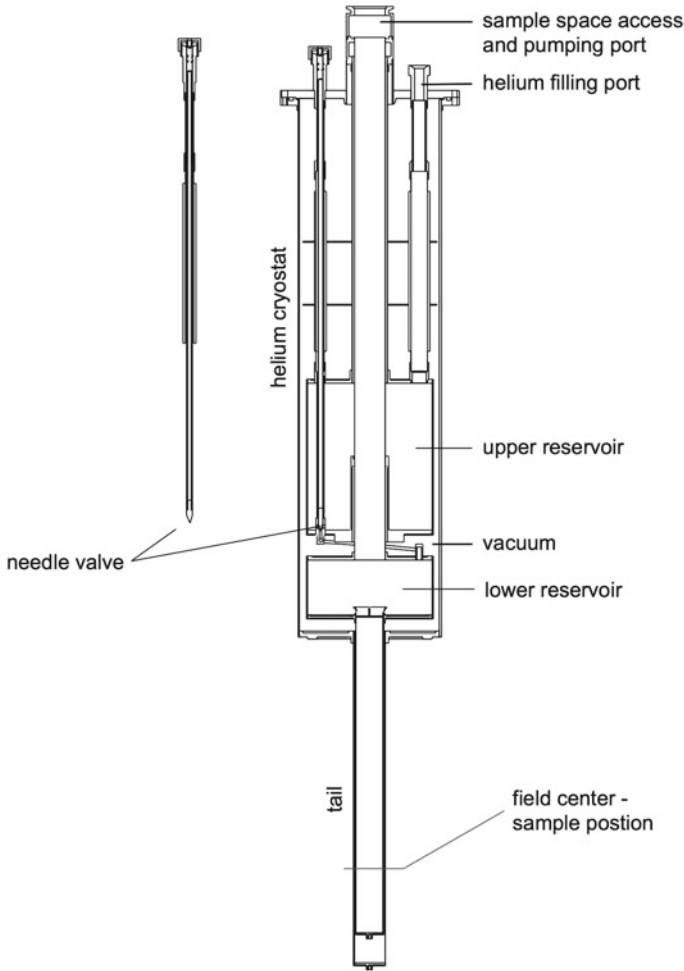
Technical drawing of the ⁴He cryostat used at the LNCMI Toulouse [1]. See text for detailed explanation
